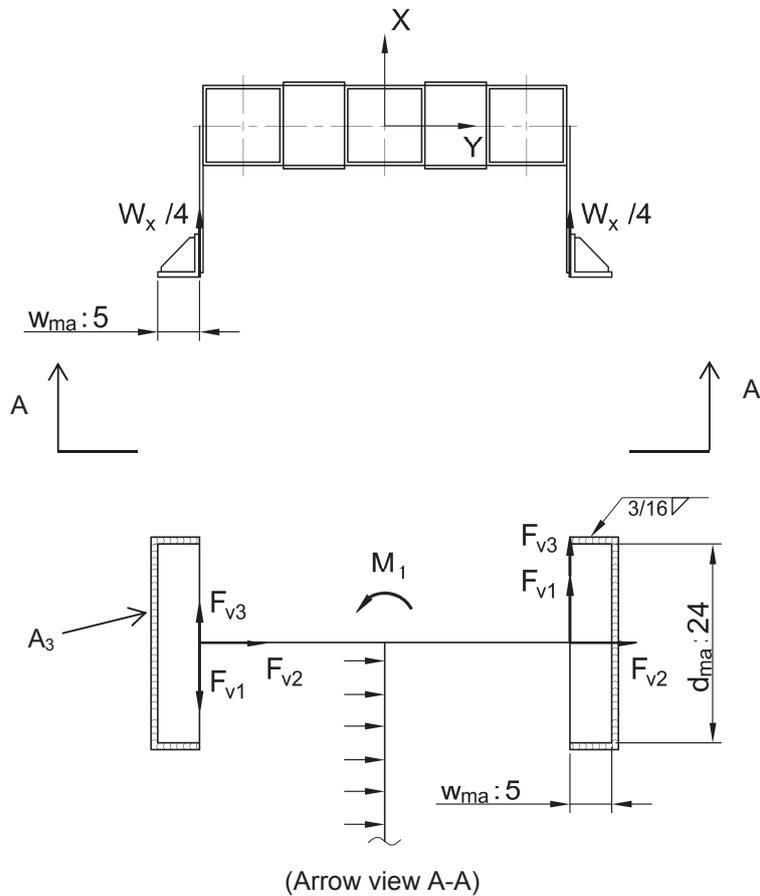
Sketch showing Mounting Angle-to-Wall Welds
